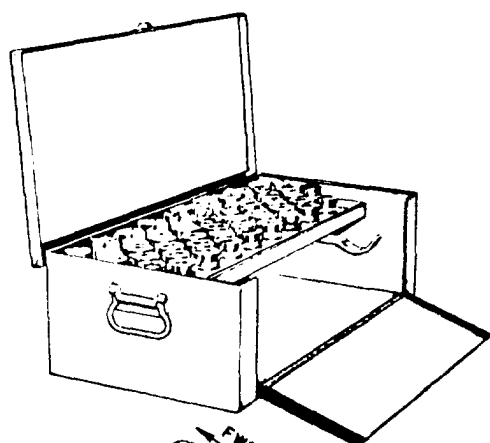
Hand-swaging tools-mechanical and pneumatic.
